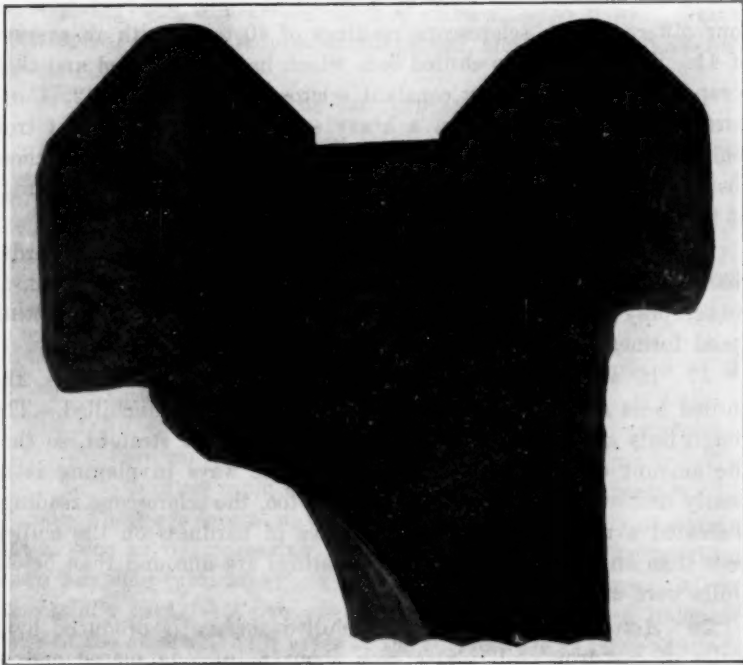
CROSS-SECTIONAL FRACTURE OF CHILLED LATHE-BED
